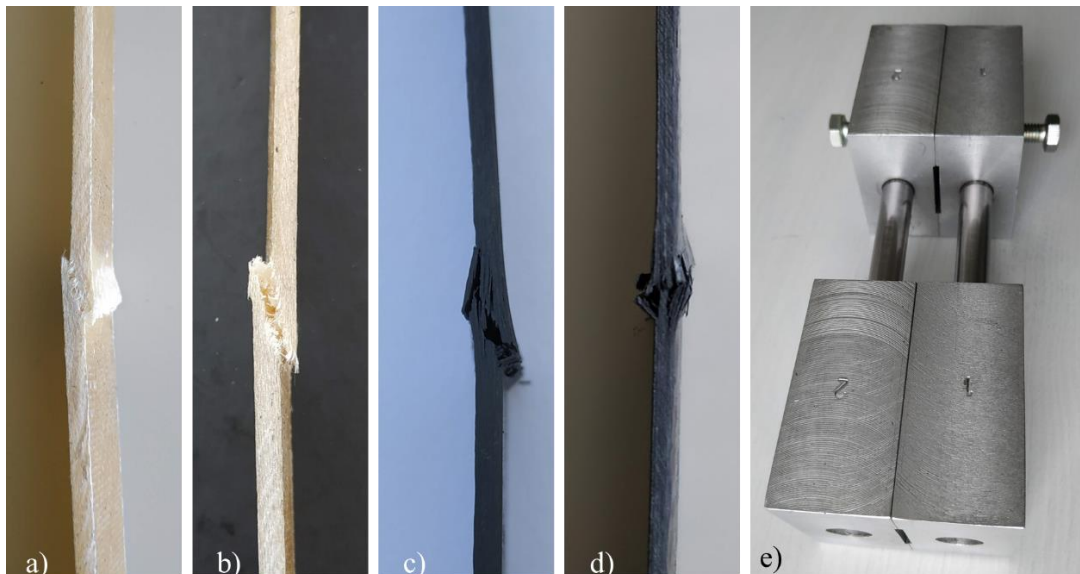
Failure modes of the compressive test (a-d) and grips for method 2 fixture (e)
